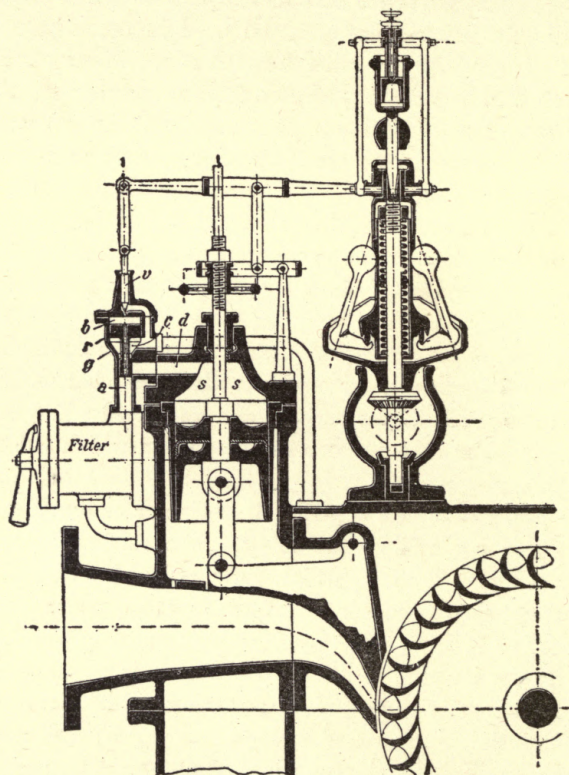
Hydraulic Governor for Impulse Turbines. Built by Escher, Wyss & Co., Zurich, Switzerland.
